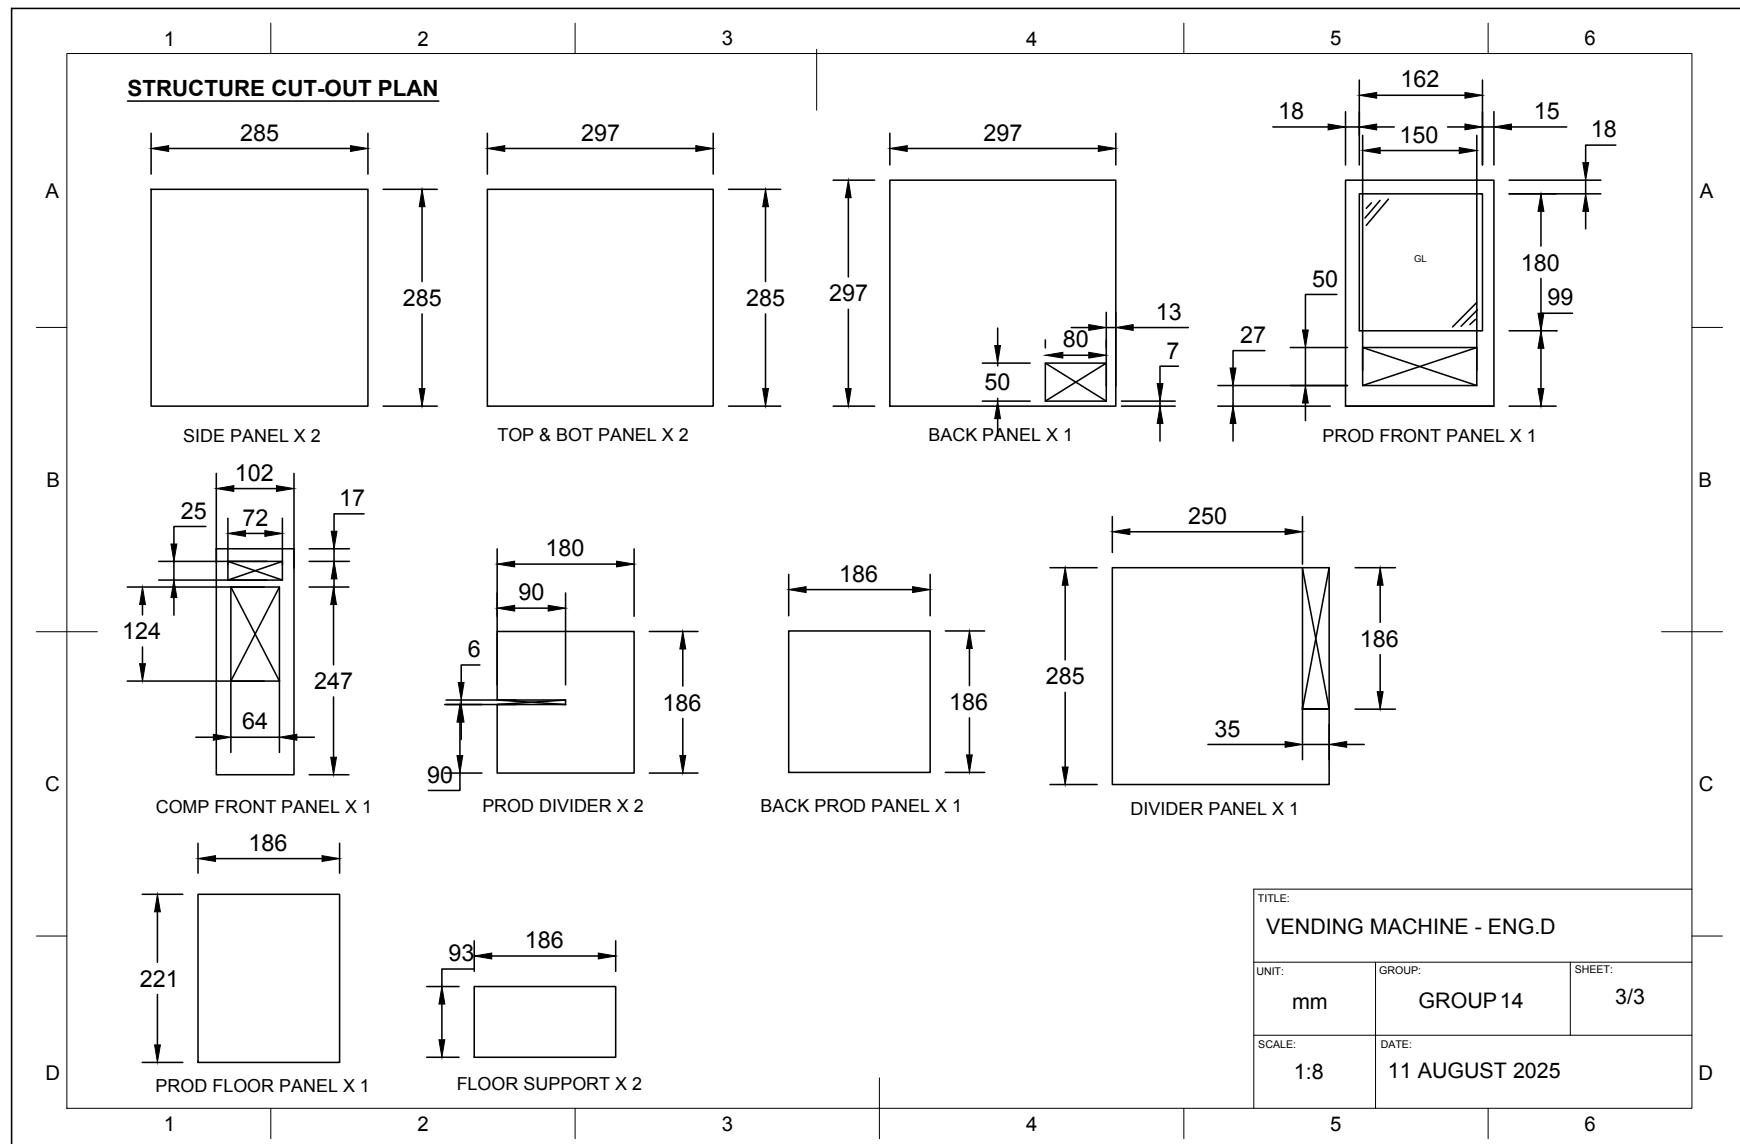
3 STRUCTURE AND CUT-OUT
